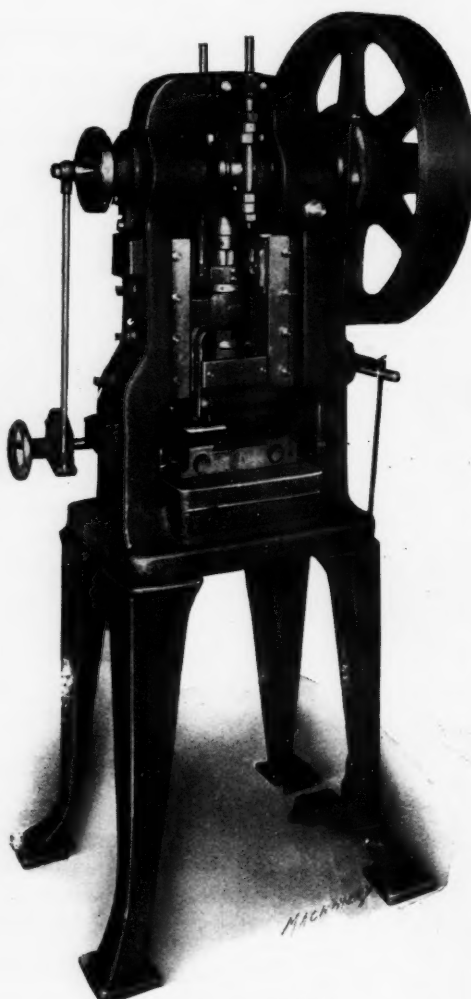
Front View of Standard Press showing Electrically Heated Die Holder
